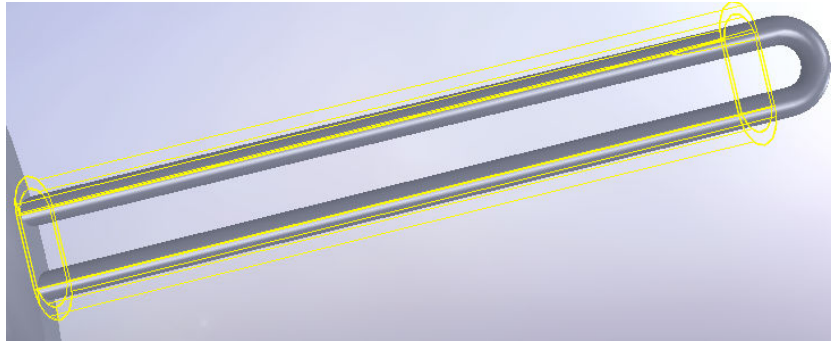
Scaffold of device in SolidWorks. Heat-shrink tubing fits over a single guide.
